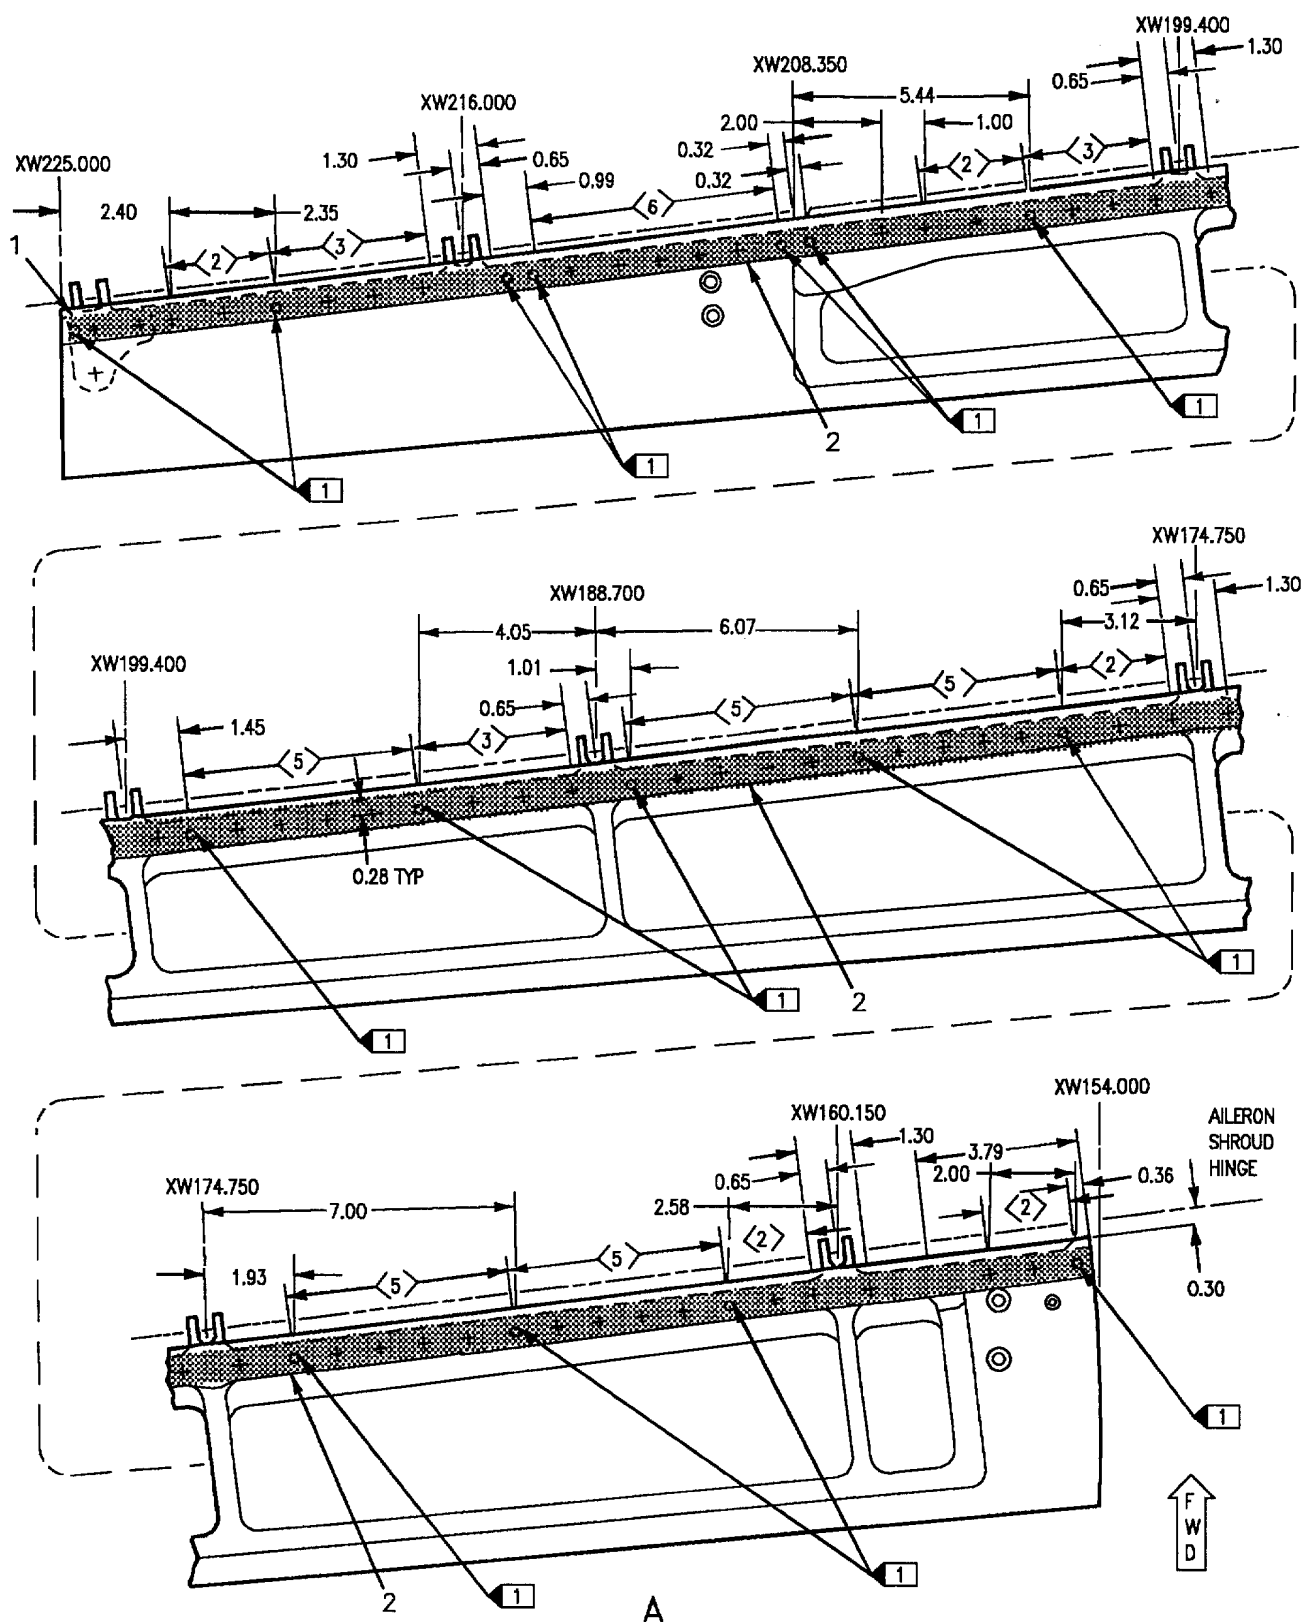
Wiper Seal, Aileron Shroud (74A170759) (Sheet 1)
